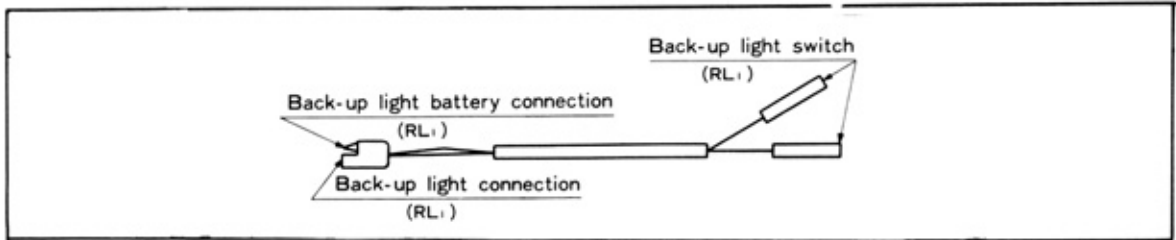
To Back-up Light Wiring Harness (COROLLA 1100,1200) G 3878
